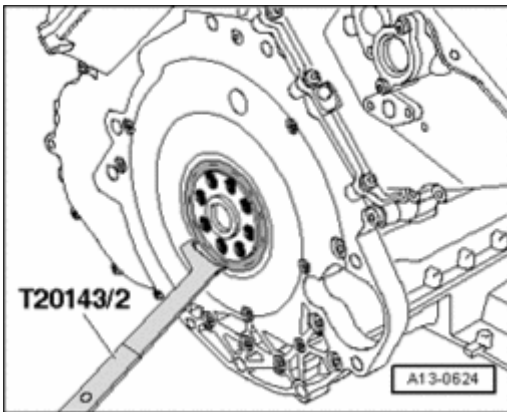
Prying Out Sealing Ring Using Pulling Hook T20143/2
